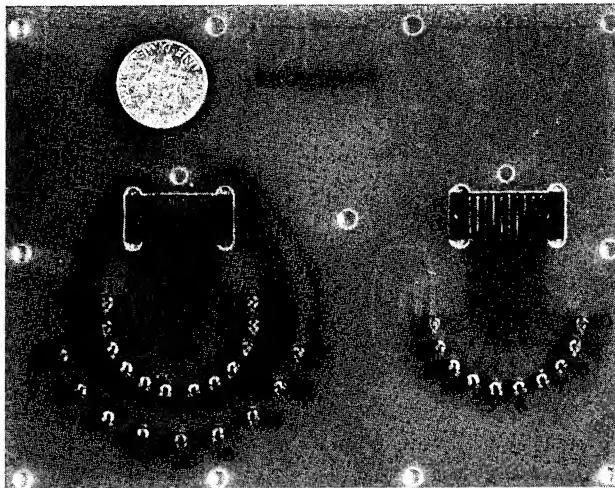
Female halves of Design No. 1, on the right, and Design No. 2, on the left, mounted in the test printed wiring board.
